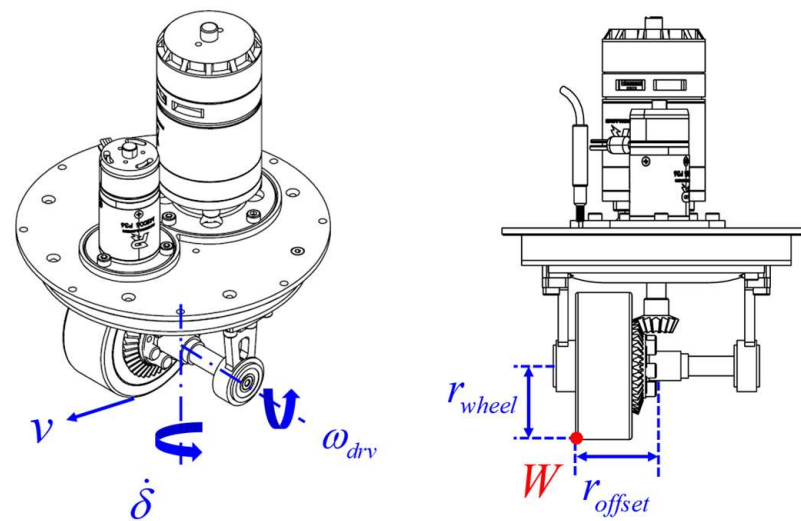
Coordination of the driving wheel and steering mechanism rotation in AISW.
